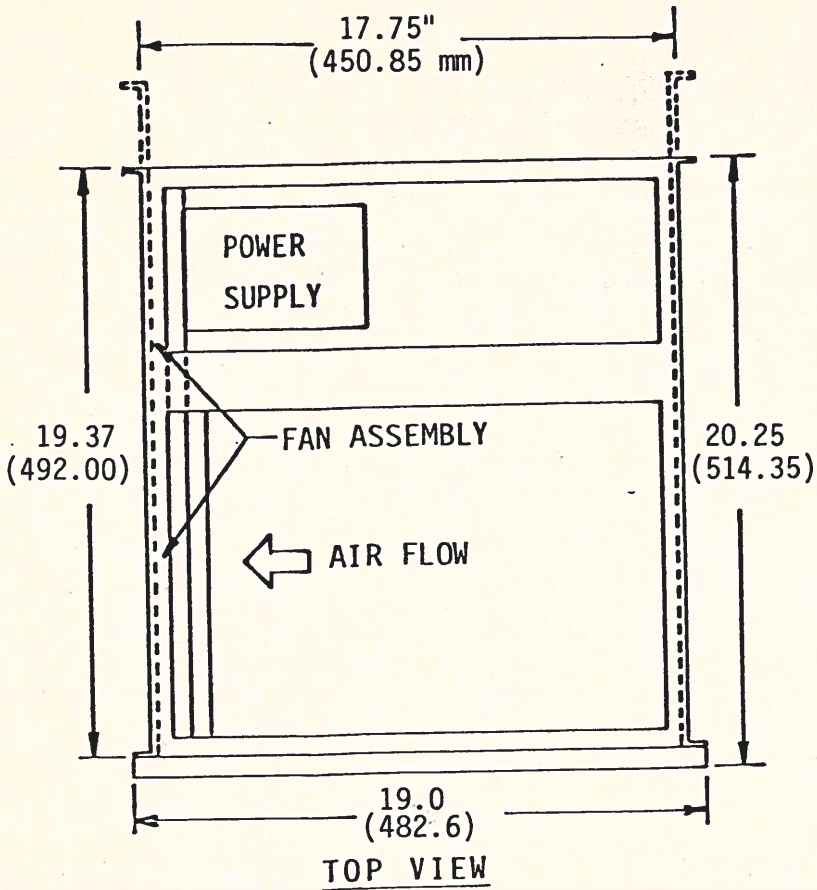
BS-101/102 INCH CHASSIS - OUTLINE DIMENSIONS
